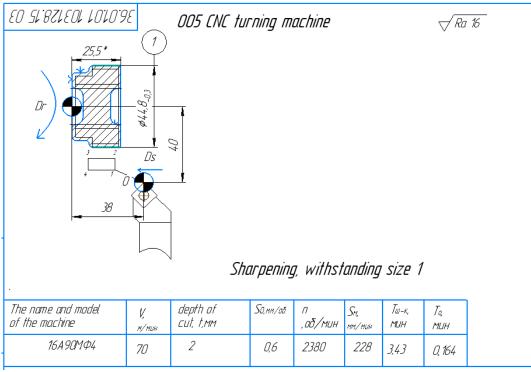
Operational drawing of CNC turning machine in Kompas 3D
